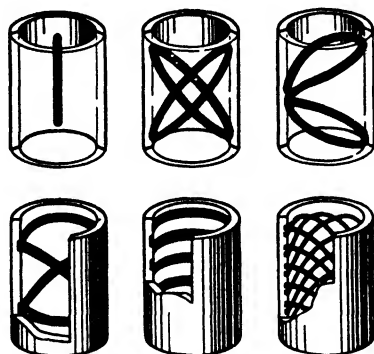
Two types of bearing bushings: *top*, straight bushings showing types of grooves for oil; *bottom*, types of grooves for graphited oilless bearing
